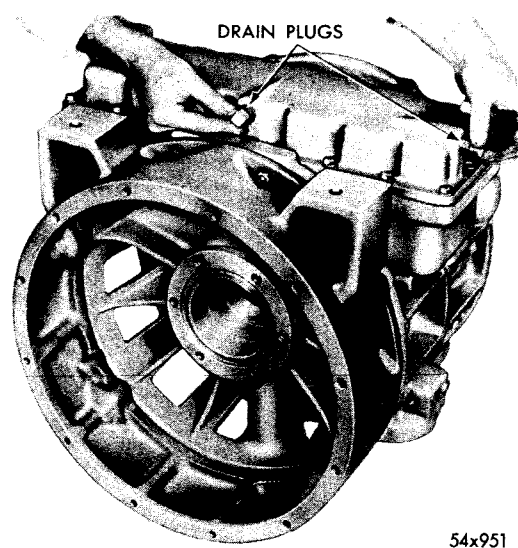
Removing or Installing the Oil Pan Drain Plugs
